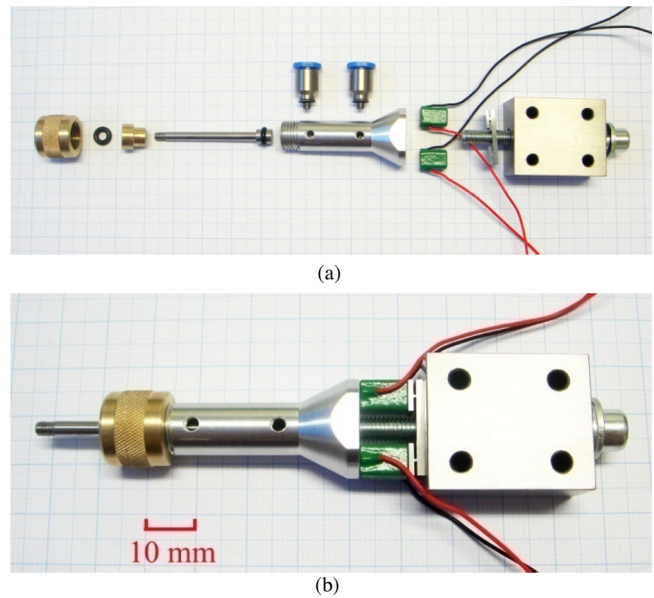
(a) Each part of the prototype (before assembling); (b) Picture of the prototype assembly.
